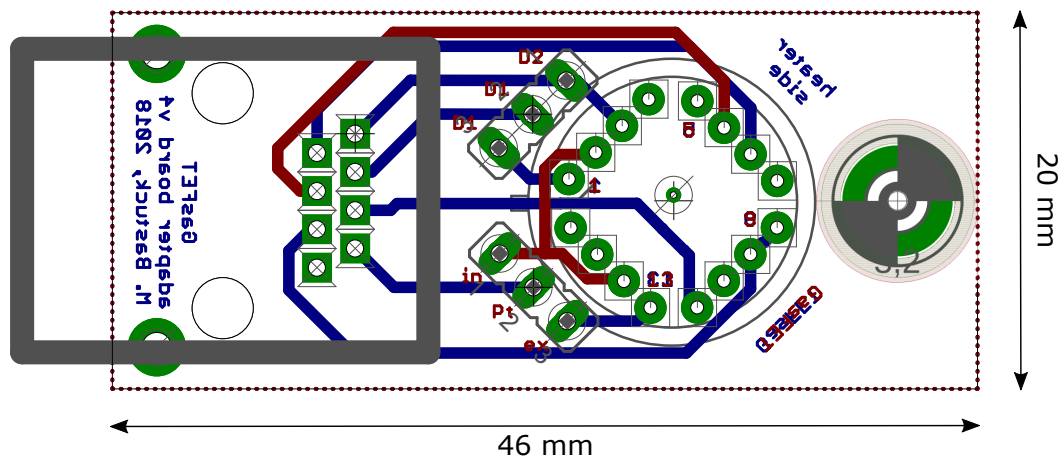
Adapter board layout for TO-8 to RJ45 (copper pouring left out for clarity).
